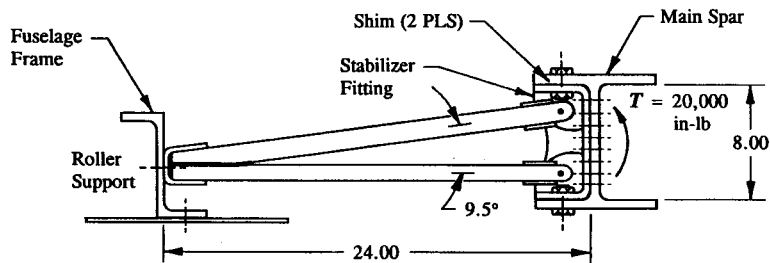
Stabilizer truss arrangement of tubular members.
